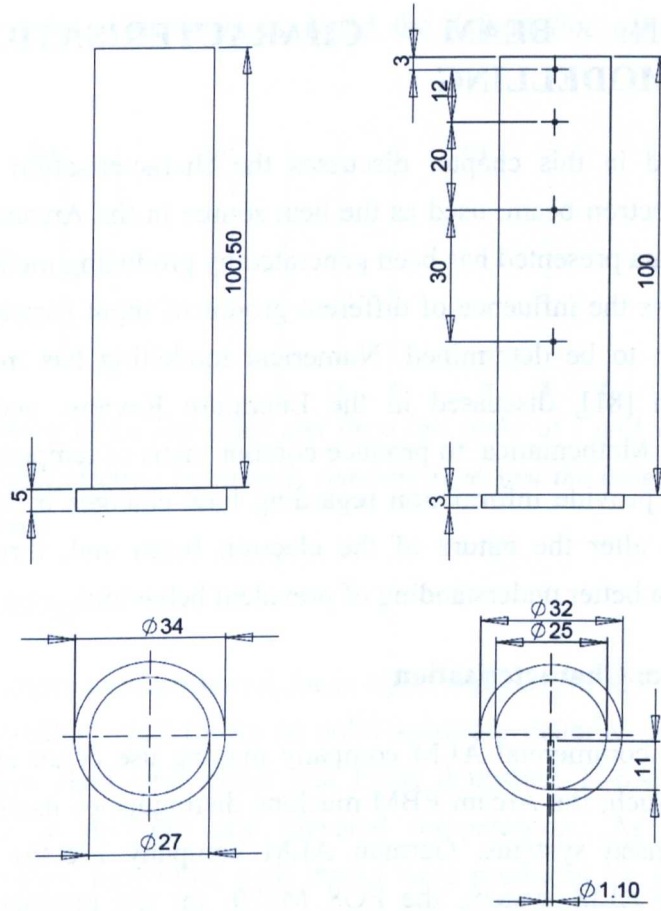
As-built (left) and machined (right) dimensions for Jominy end quench specimen
